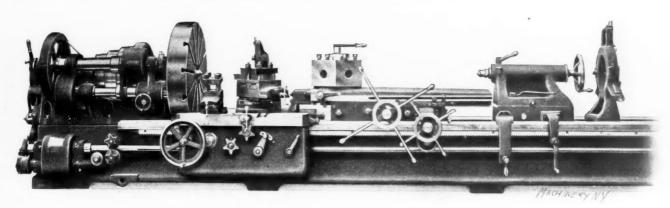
Front View of Heavy "American" Lathe, with Turret mounted on Independent Slide on Shears,
